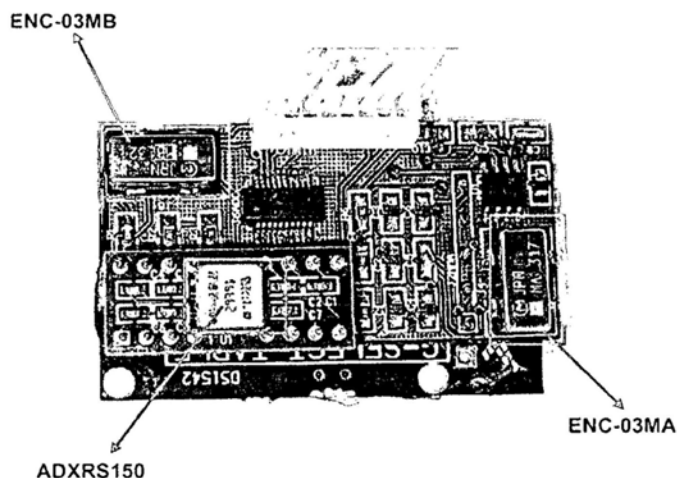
Top-side view of the PCB board for the 3D gyroscopes
